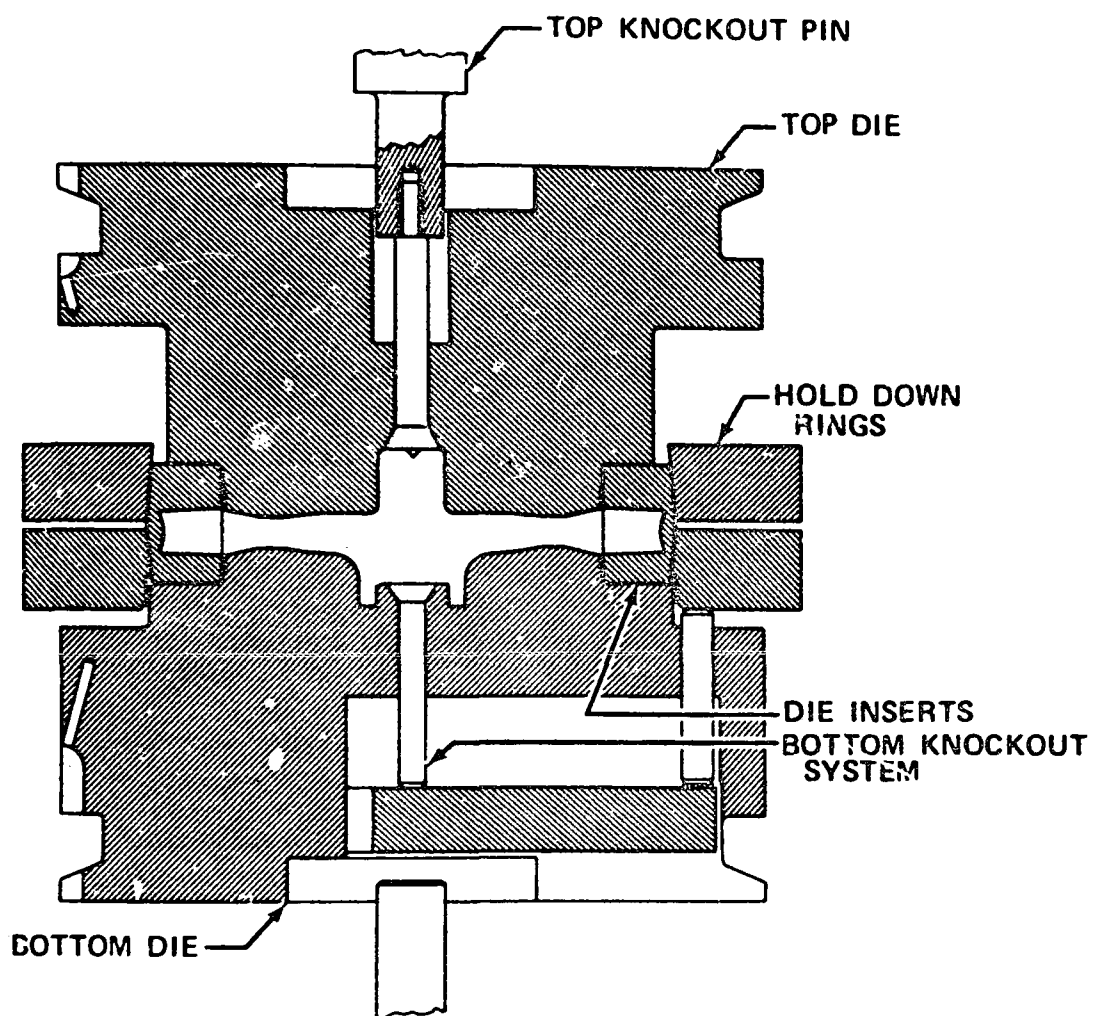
Tool for Phase I - Task 2 Bladed Rotor
